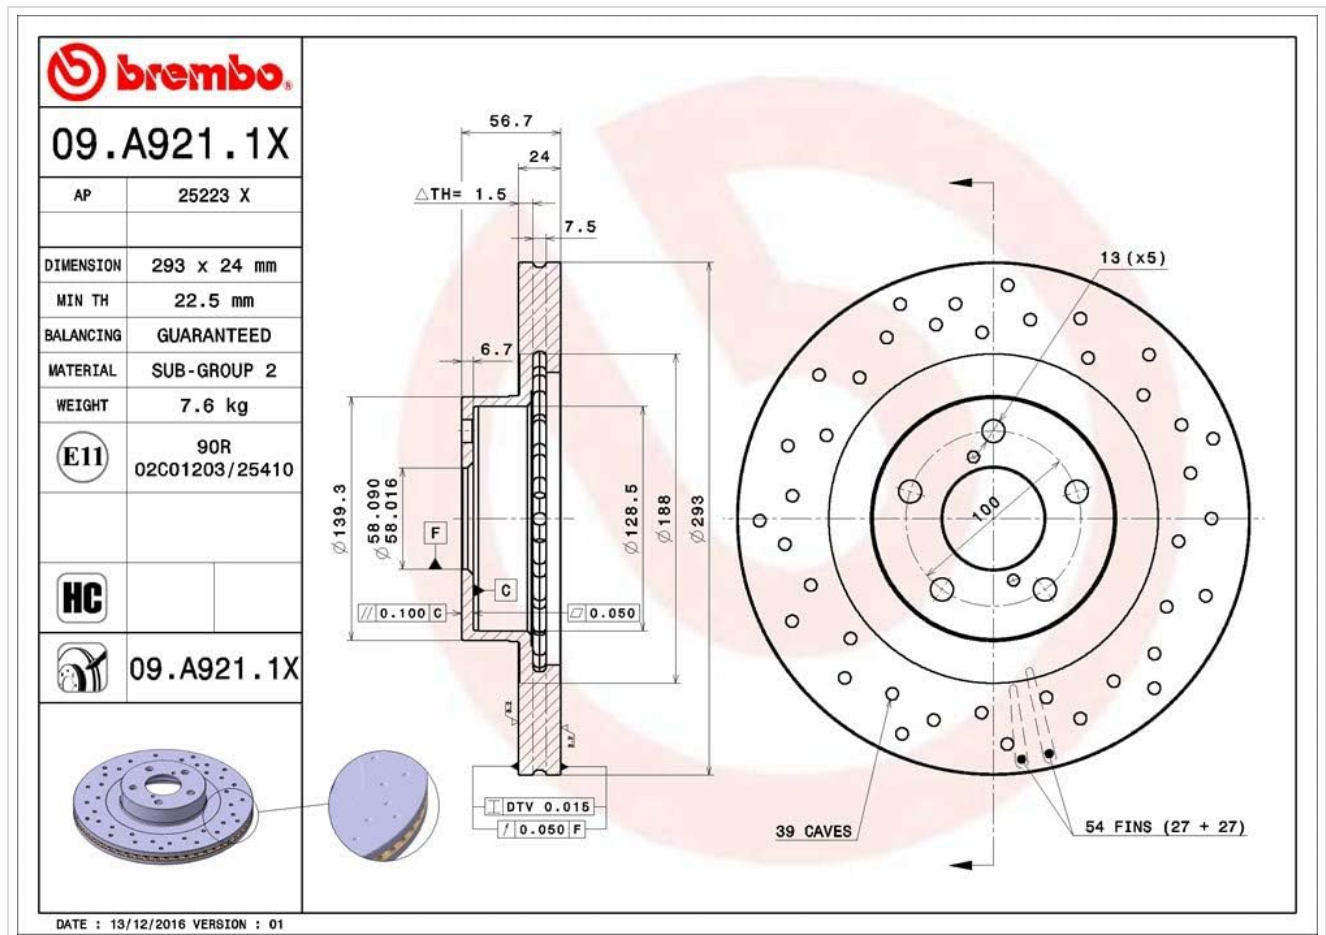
Technical drawing of the Brembo 09.A921.1X brake rotor, detailing dimensions, bolt pattern, and internal venting structure. This diagram provides
